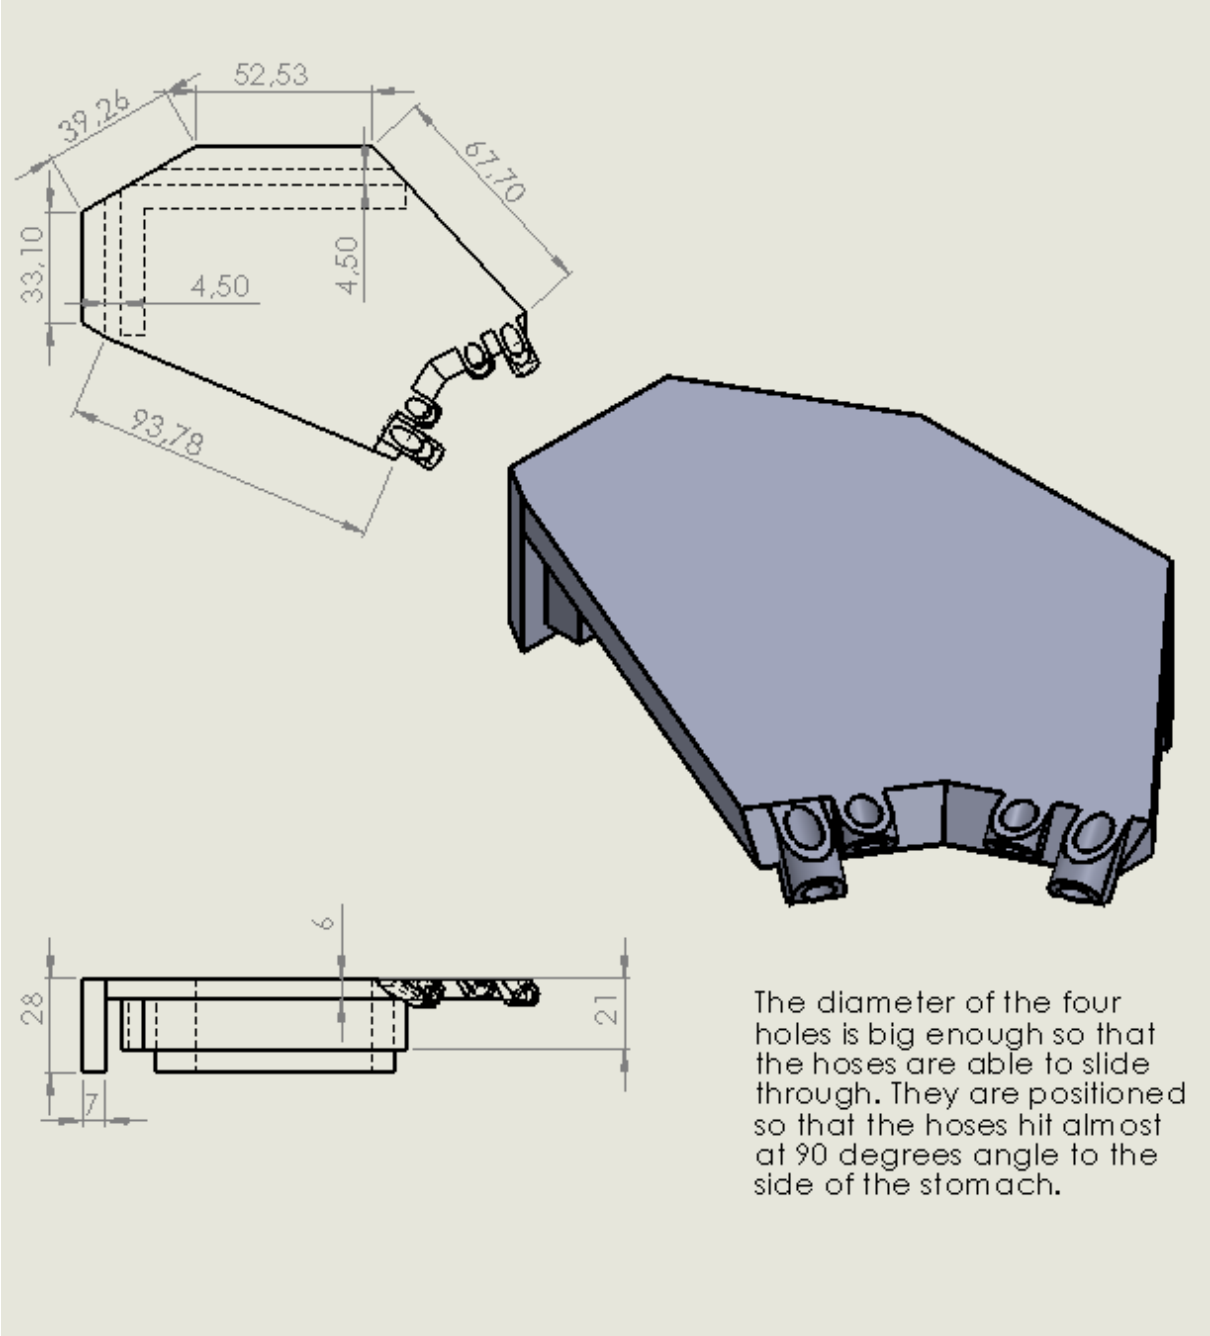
Drawing of the "Hose fixture for water bath" with dimensions.
